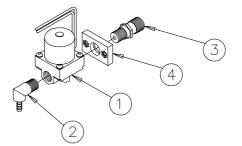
Exploded diagram of gas pipe (U5185G00)
